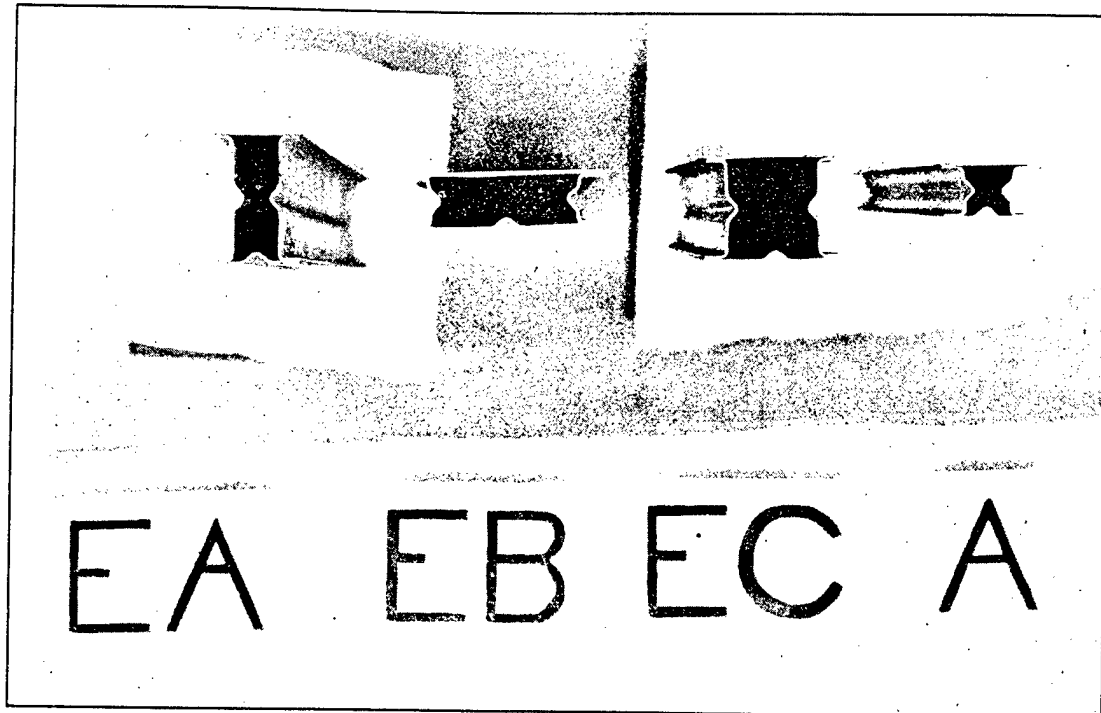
Typical EA, EB, EC, and A Series Stiffener Sections.
